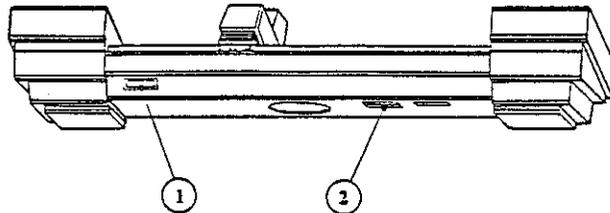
REAR AND BOTTOM VIEW OF CUTTER
